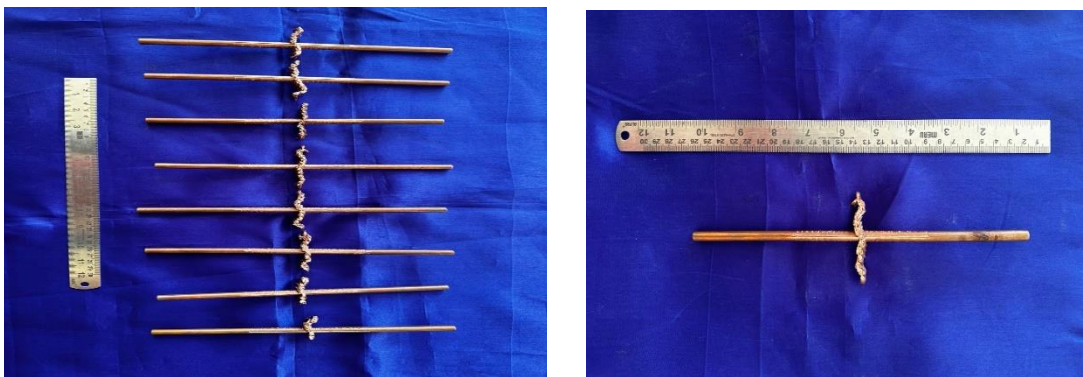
& 1.22. Cold welded Copper rods
